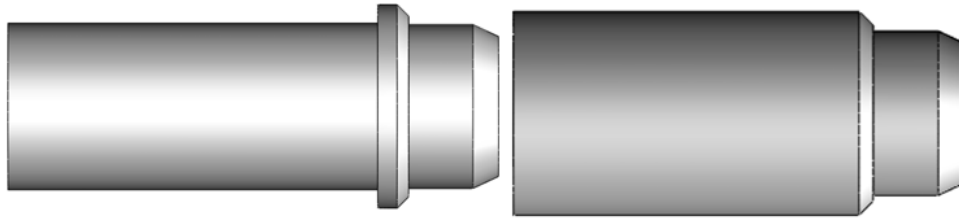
Rough machined blanks of 10223-DT-461 (left) and 10223-DT-454 (right) are shown.
